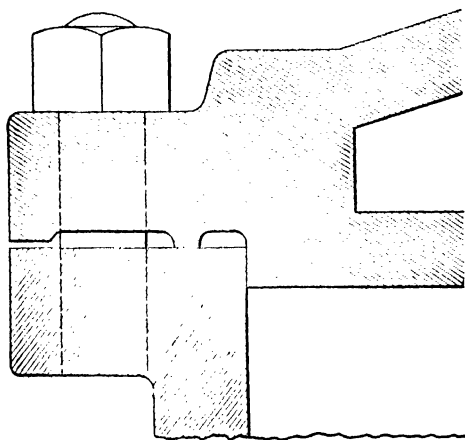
Cylinder cover joint of the Straight-Line engine.
